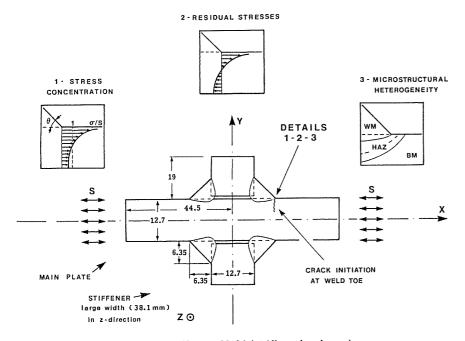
The cruciform welded joint (dimensions in mm)
